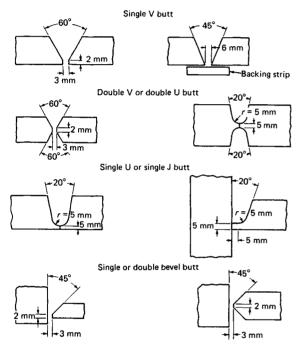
Typical butt welds. *Note*: angles and dimensions of root gaps and root faces may be altered to suit welding technique and position of weld, the above being suitable for flat-position welding. Welding is carried out from both sides of all preparations except where a backing strip is employed. To achieve complete penetration, back-gouging (back-grooving) may be employed
